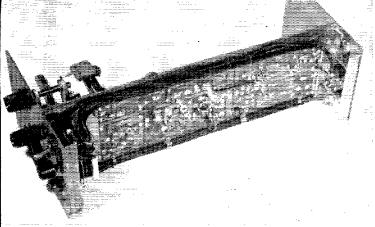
Bottom view of the mixer-converter unit showing placement of components and method of cabling the coaxial leads.
